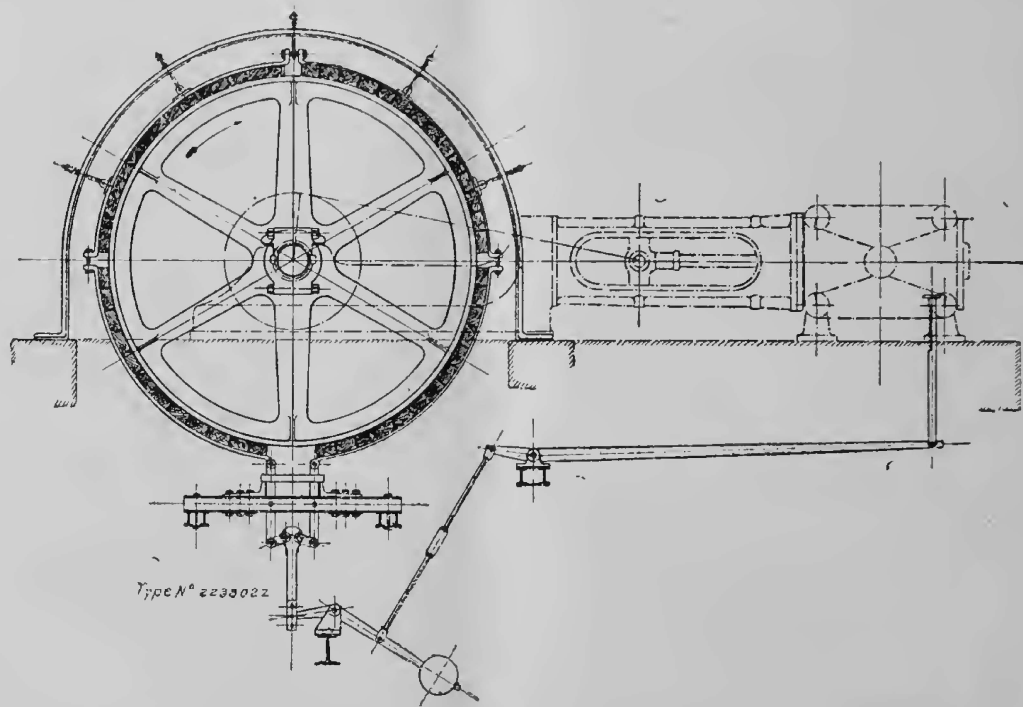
Elevation showing Application of the "A.B.S." Brake to a Winding Engine.
